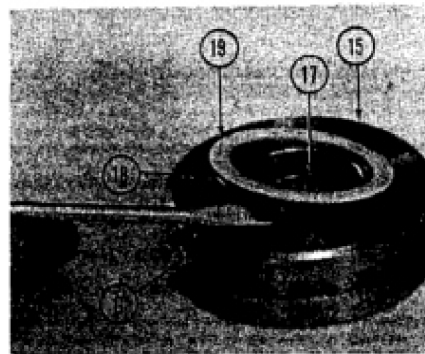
Lifting the Teflon rotor seal (19) and "O" ring (18) from bearing support (15). Needle bearing (17) is serviced separately from bearing support. Groove (G) is for support sealing "O" ring (16—Fig. 46). Identical seals (18 and 19) are used in pressure plate.
